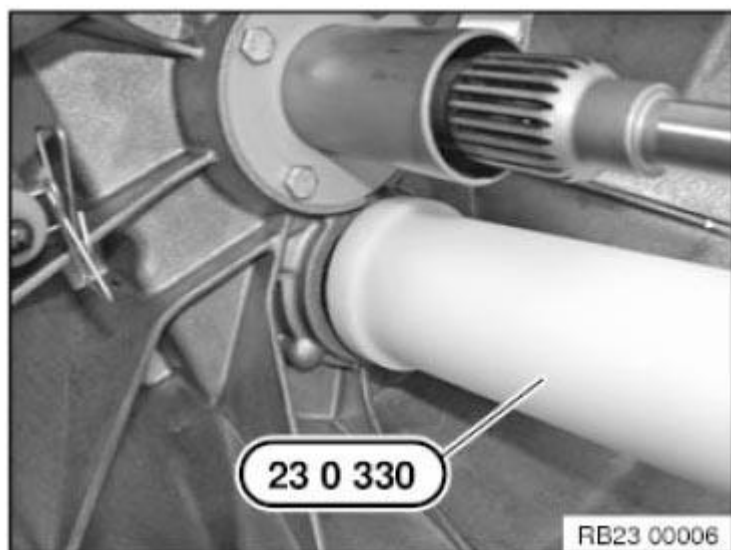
Driving Sealing Cap Using Special Tool (23 0 330)
